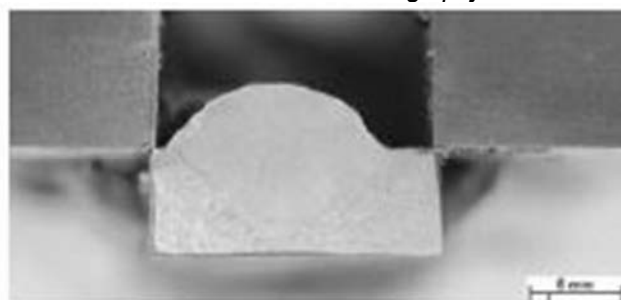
Root weld geometry of reference single pass weld without magnetic arc deflection
